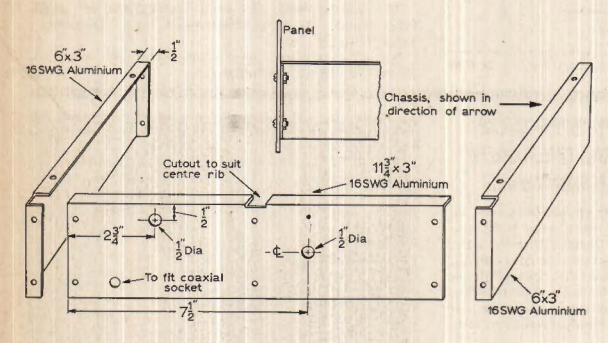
Exploded view of chassis members. Note that panel extends below the bottom of the chassis, see Fig. 6. Part One. Since the rear member carries only the coaxial socket it can be left off until all wiring and constructional work is completed.
